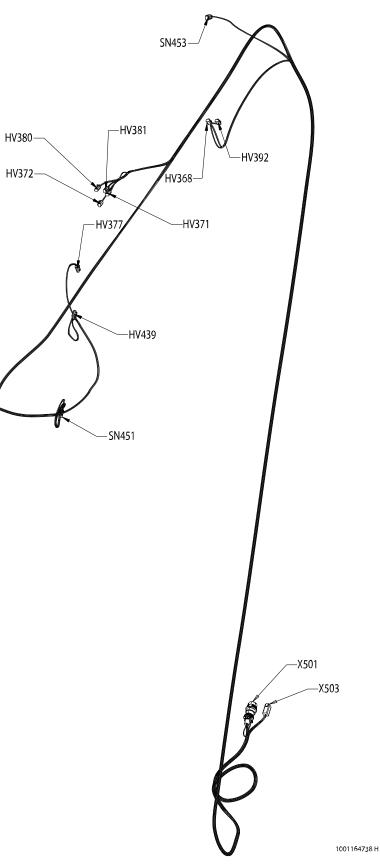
Tower Upright Valve Harness - Sheet 4 of 4
